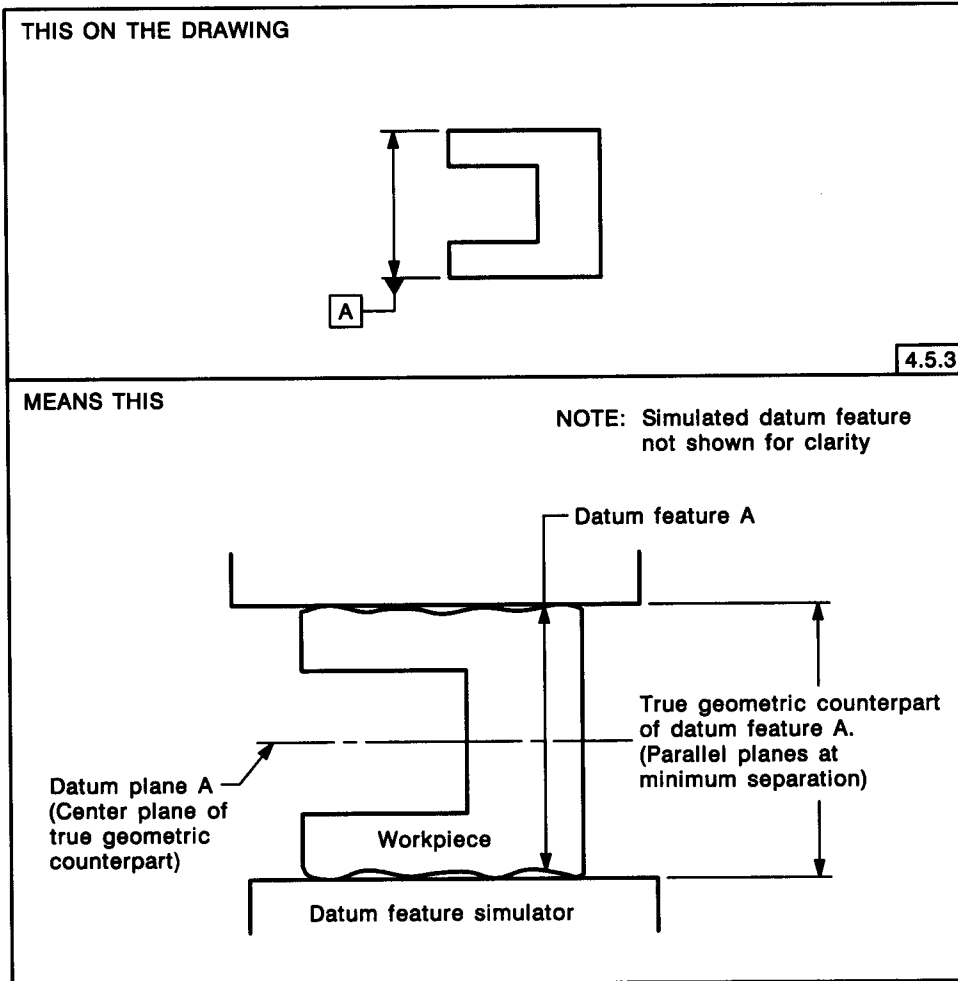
PRIMARY EXTERNAL DATUM WIDTH — RFS
